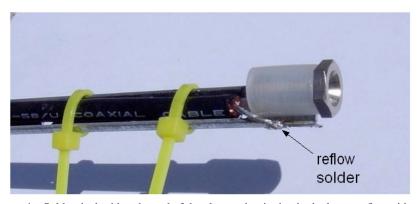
Solder the braid to the end of the element by tinning both elements first with a 250 Watt soldering gun. Then quickly attach the braid by using reflow soldering.
